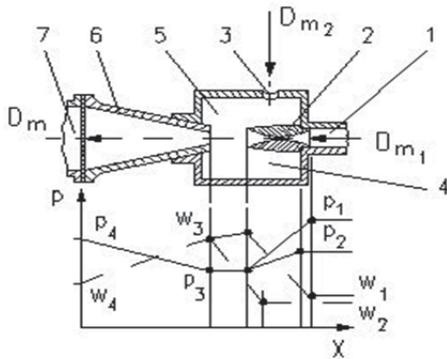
Schematic diagram of the eductor: 1- driving nozzle 2- diffuser throat; 3 – suction nozzle; 4 – suction chamber; 5- mixing section; 6- diffuser; 7- converging-diverging outlet nozzle [3].
